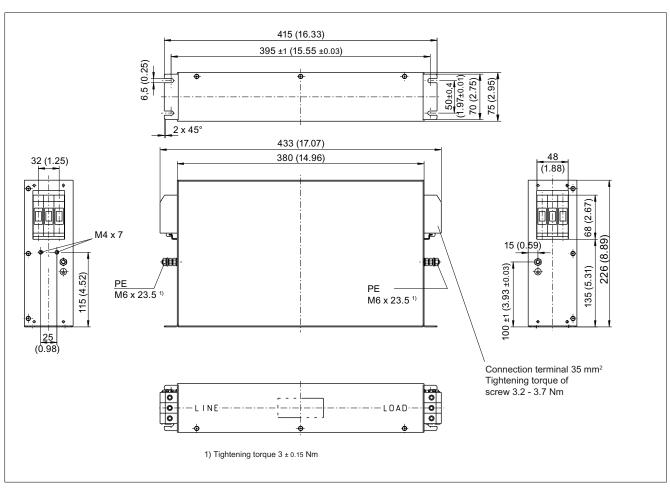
Dimension drawing of Basic Line Filter for Smart Line Modules 36 kW, order number 6SL3000-0BE23-6DA1, all dimensions in mm and (inches)
